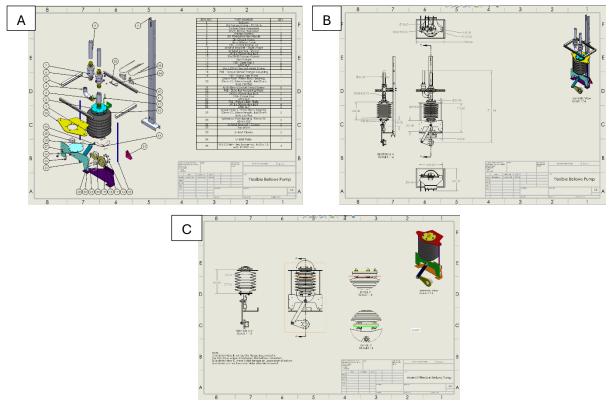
a) Exploded Drawing b) Whole Assembly Drawing c) Detailed Drawing of Bellows Assembly
